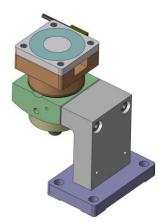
ADE sensor mounted in Vertical Position Sensor Assembly. Note orientation of sensor cable.
